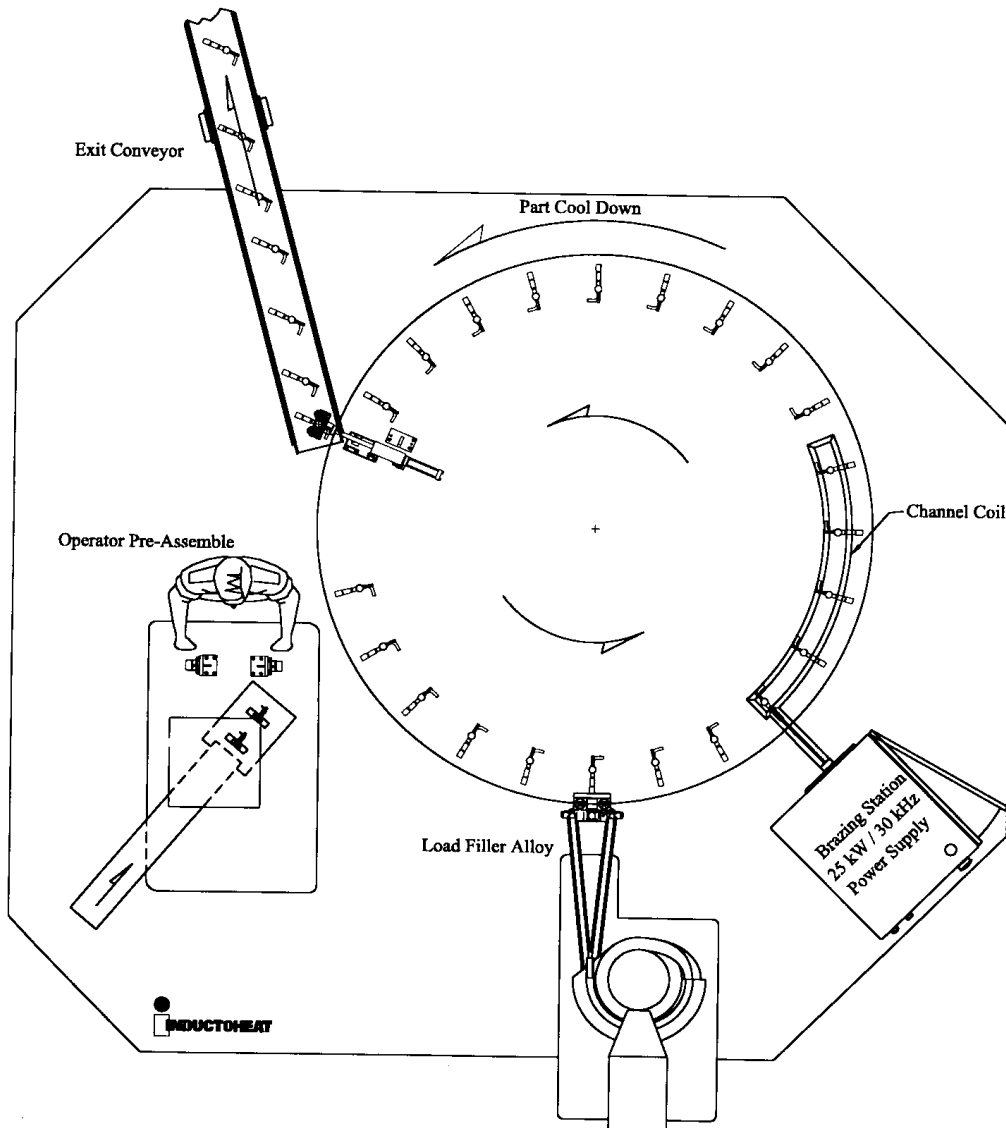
Automatic induction brazing station for brazing two areas of a brass valve assembly.
